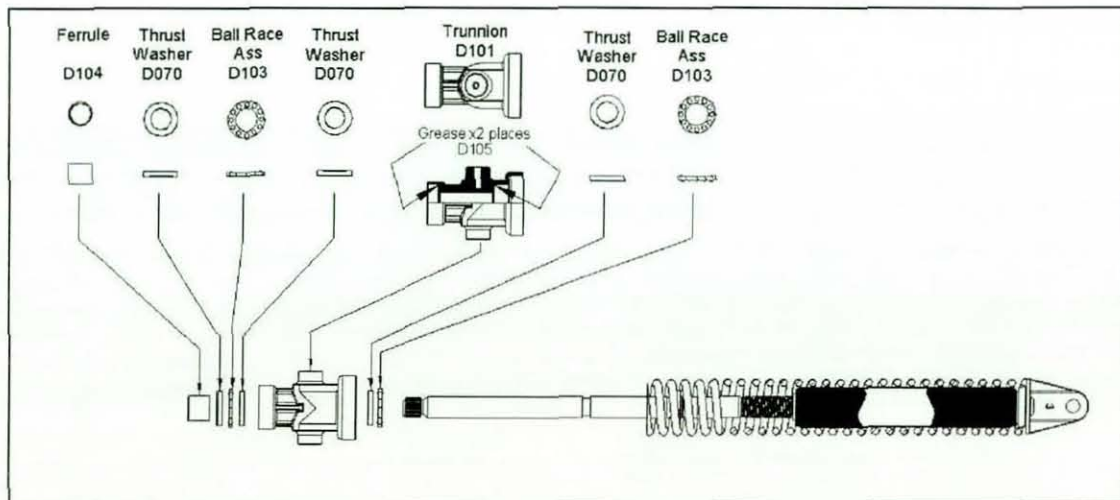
Drawing of components assembled in the correct order onto the spindle shaft for Assembly 05 station.
